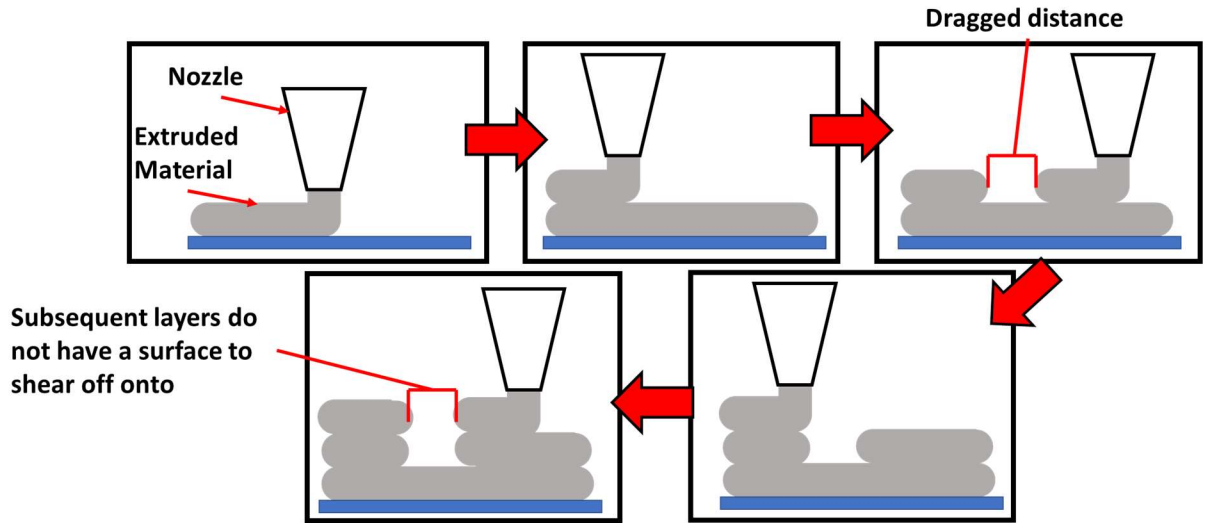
Layer by layer 3D printing process – filamentary extrusion is dragged across printing surface rather than deposited.
